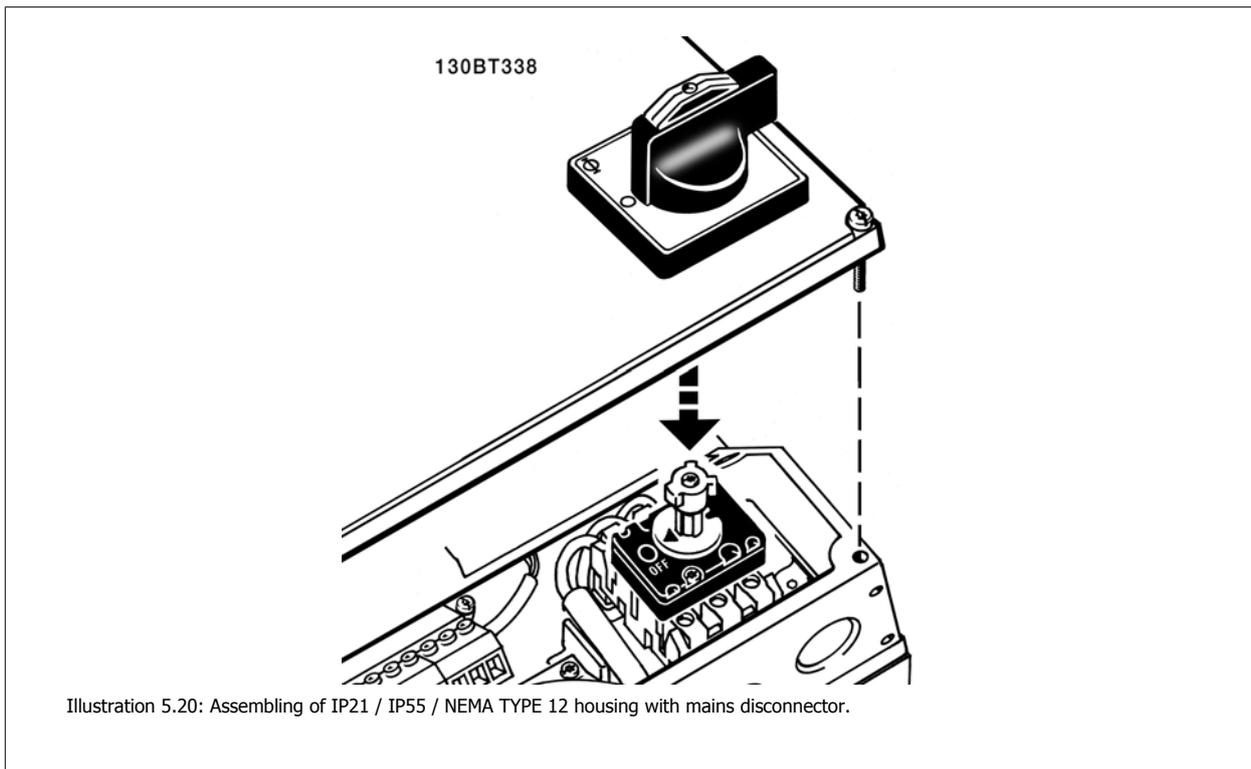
Assembling of IP21 / IP55 / NEMA TYPE 12 housing with mains disconnect.
